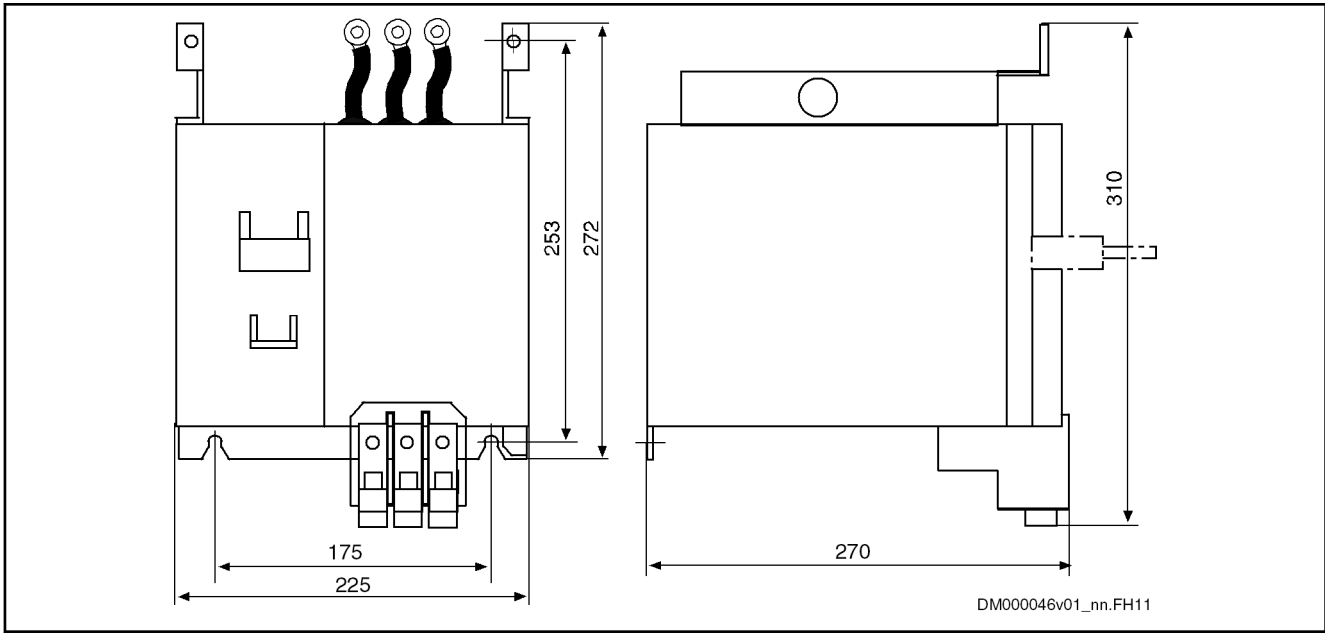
Mains filter dimensions HNK01.1A-A075-E0080/0106
